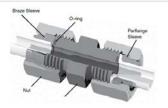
Seal-Lok Union cutaway with flanged and brazed assemblies
